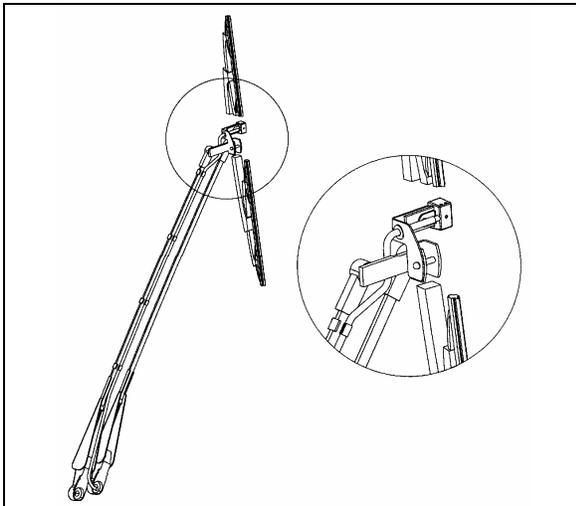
WINDSHIELD WIPER (DRIVER SIDE) 23334
